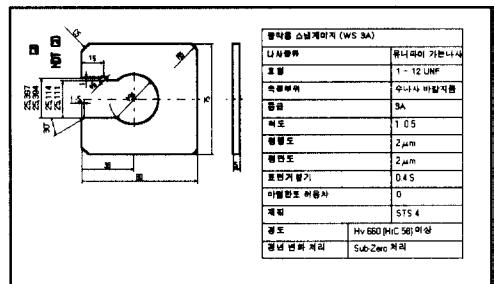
Snap gauge for unified fine screw thread - Major diameter
